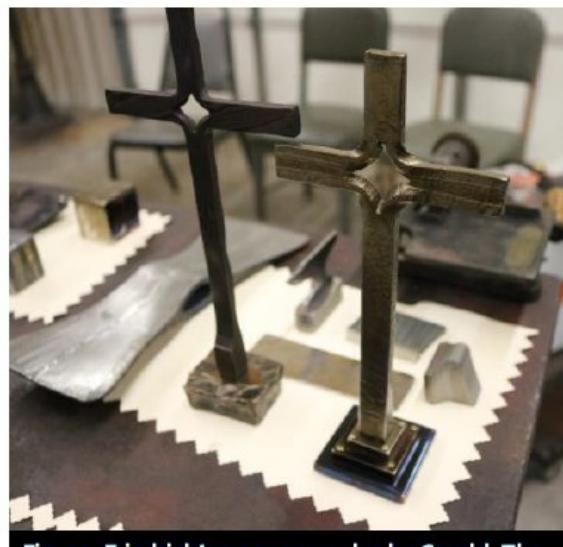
Friedrich's cross examples by Gerald. The detail in these crosses is really amazing.
